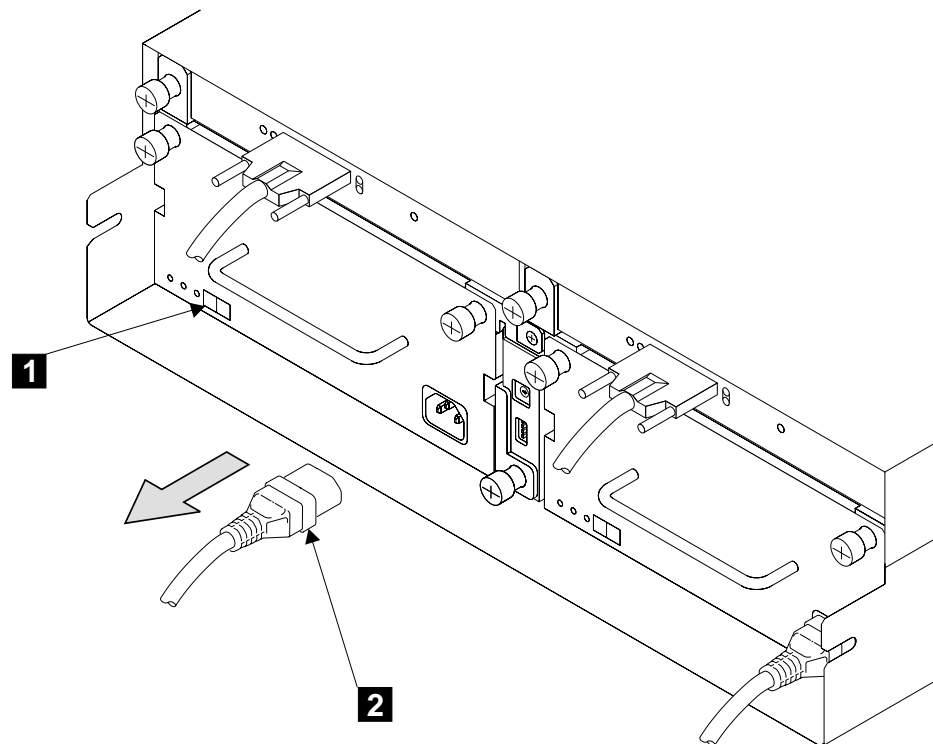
Switching Off and Disconnecting a Fan-and-Power-Supply Assembly
